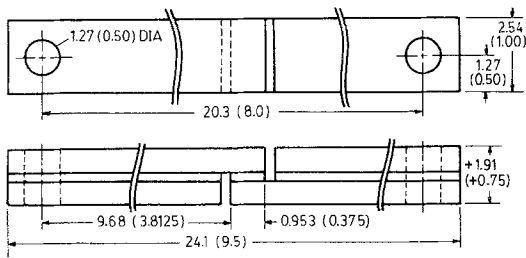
Mechanical drawing of symmetric single-lap shear joint. Dimensions given in cm (in.).
